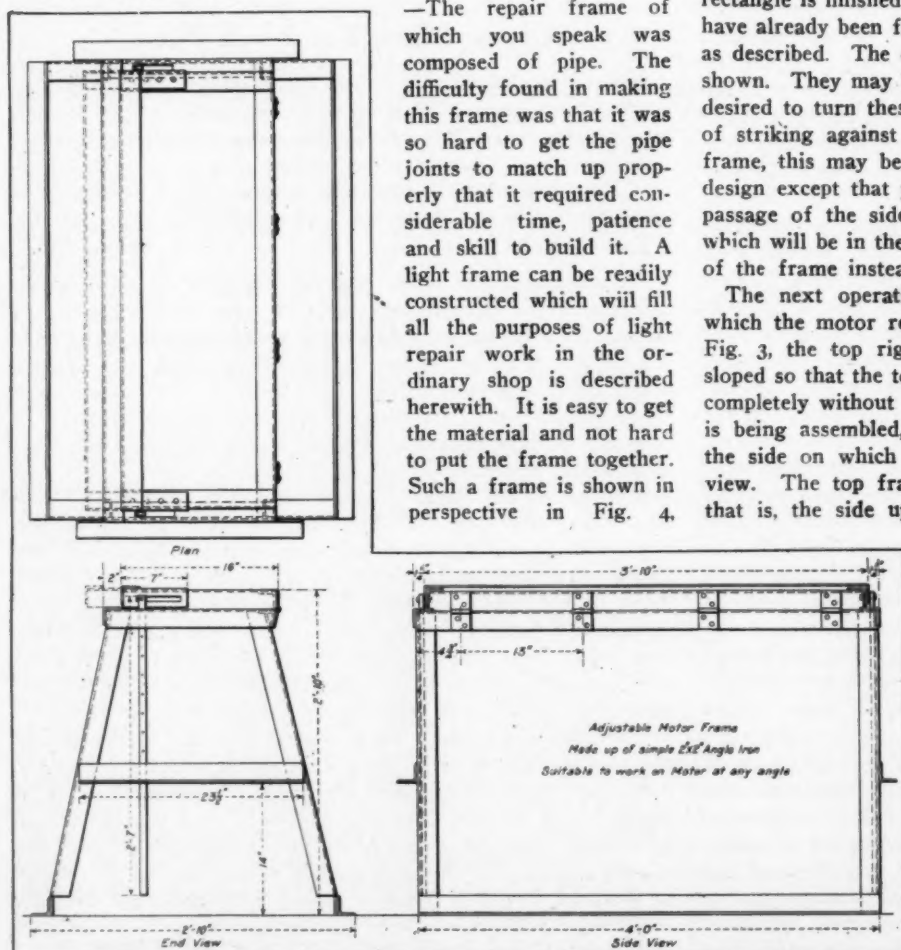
Working drawing of home-made motor rack, with principal dimensions
